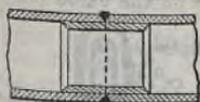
V-type chill sleeve. Sleeve inside joint prevents "icicles" from welding but reduces internal diameter.
